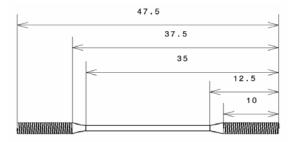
Dimension of impact tension specimen with threaded (mm).
